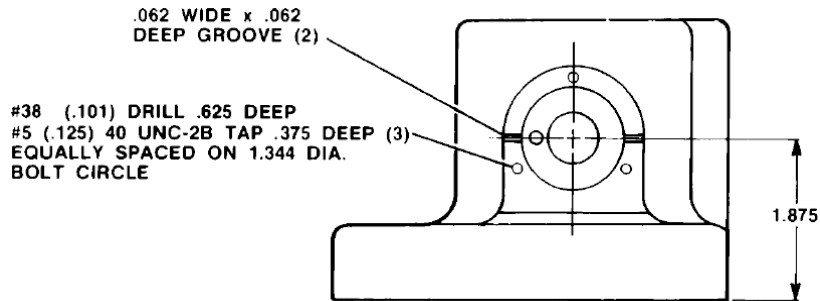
Dimensions for Machining 12 ft-lb Servo Cylinder for Weatherproof Boot
